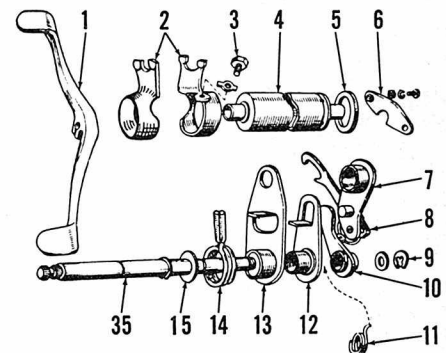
Exploded view of typical kick starter assembly.
